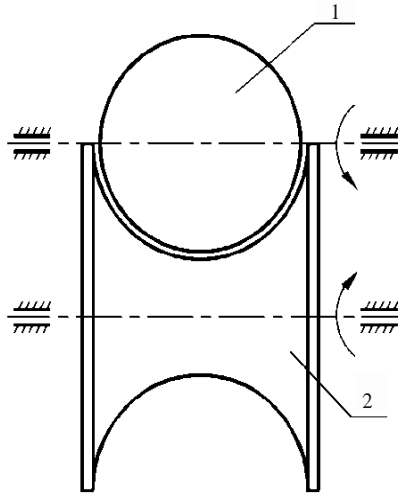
Rolling device for waste process: 1 – roller is made in the form of a layer; 2 – a roller with a concave surface [23]
